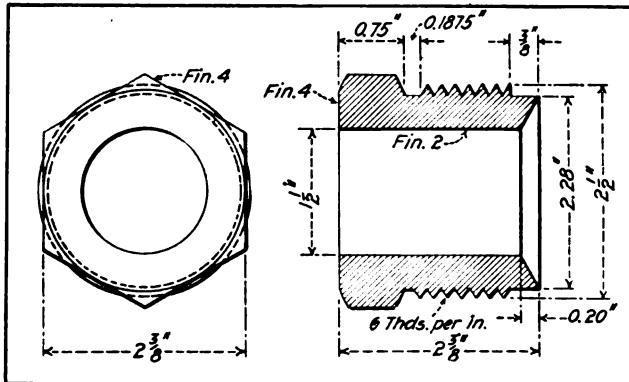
System for Indicating Finished Surfaces Applied to a Drawing.
